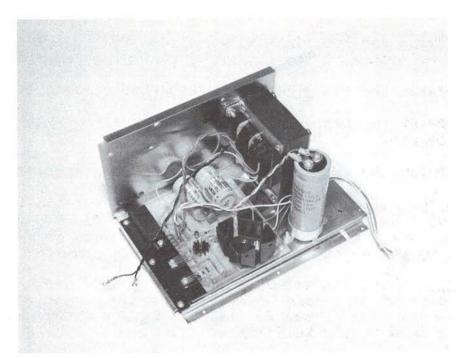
Sol-10 power supply subchassis assembly. (Rear of subchassis at left.)
